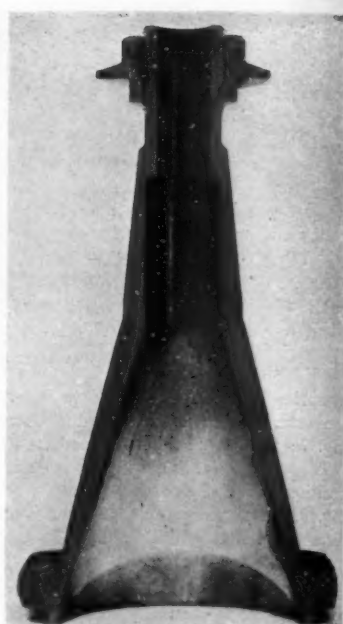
Section through centre bearer attachment Do. 217 engine bearer.
